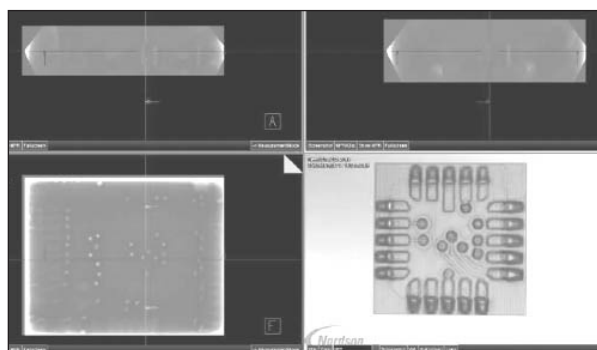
3D X-ray image analysis depicting clearly the top layer of the PCB.
